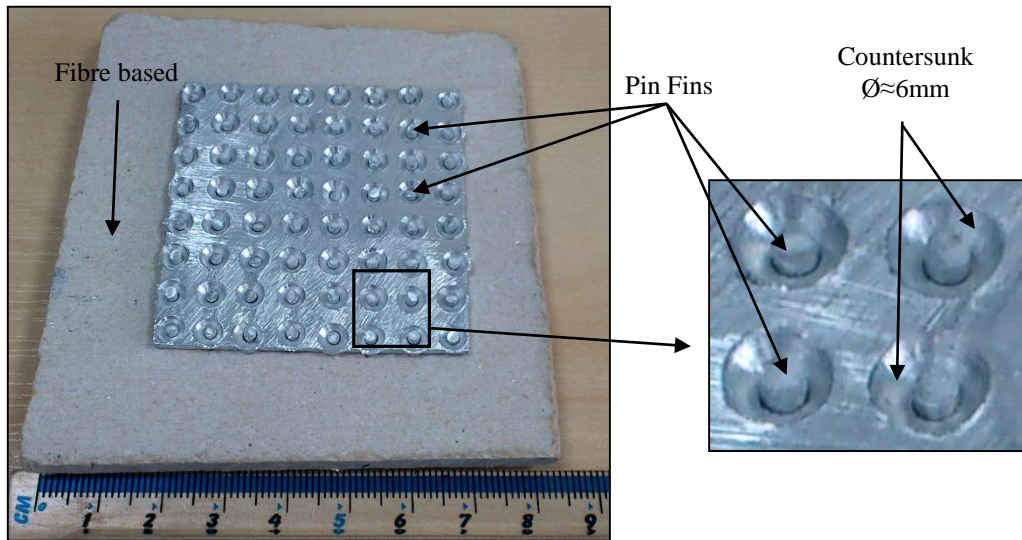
Inserting pin fins through holes of base plate with countersunk at the bottom of the heat sink
